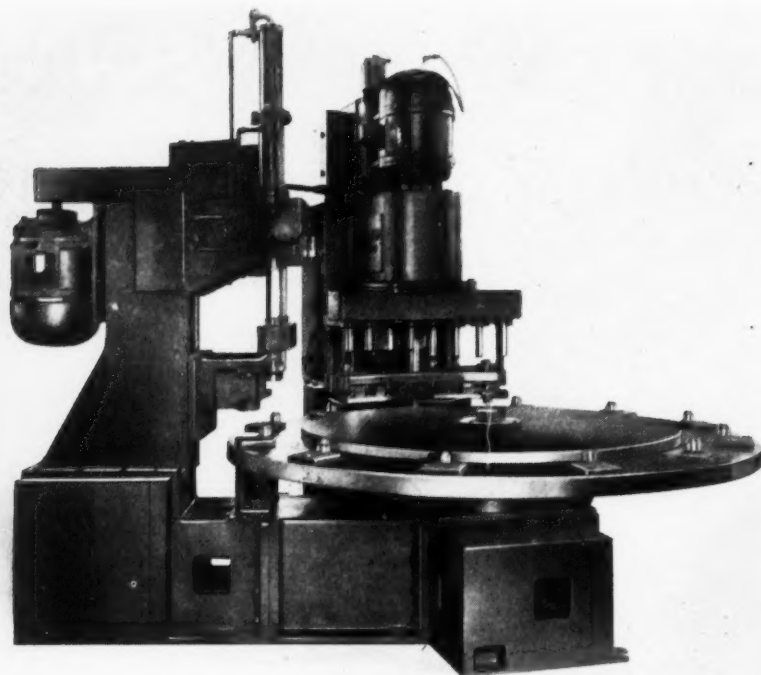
Special Two-unit Baker Brothers Machine Equipped with Eight-spindle Multiple Head and Four-spindle Tapping Unit for Automatically Drilling, Chamfering, and Tapping Forty-eight Holes in Turret Rings for Tanks
